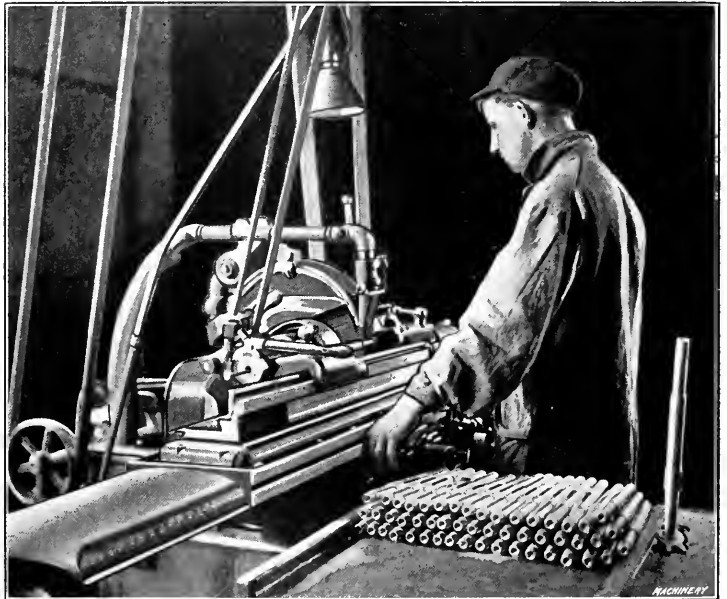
Grinding Armature Shafts on a Norton Plain Grinding Machine
